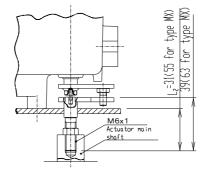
Example of sude attaching using fork lever assembly MX Fig.20 Example of backside attaching using fork lever assembly SX
